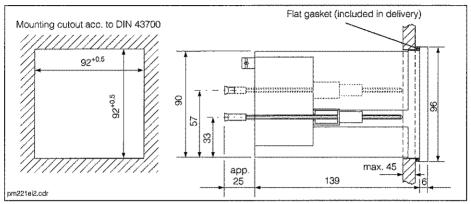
Panel mounting of Liquisvs CPM 221
